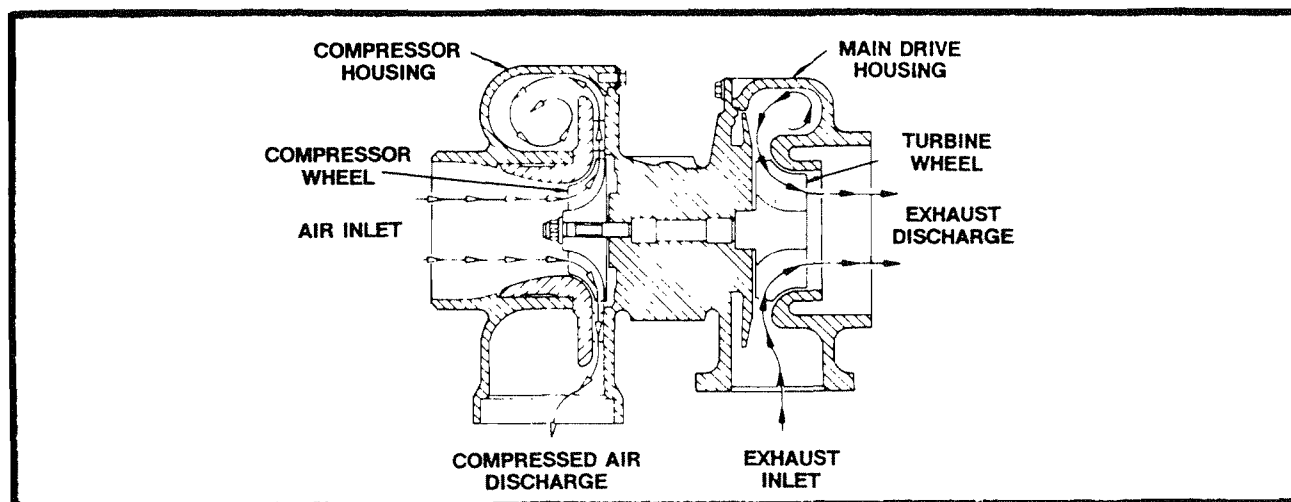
TURBOCHARGER SECTIONAL.
